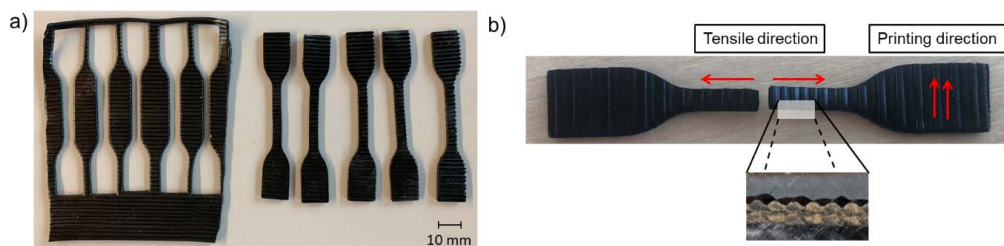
S2 tensile specimens. (a) Stamped-out specimen before vulcanization. (b) Scheme of a single S2 specimen after a tensile test (test direction perpendicular to print direction, parallel printing pattern).
